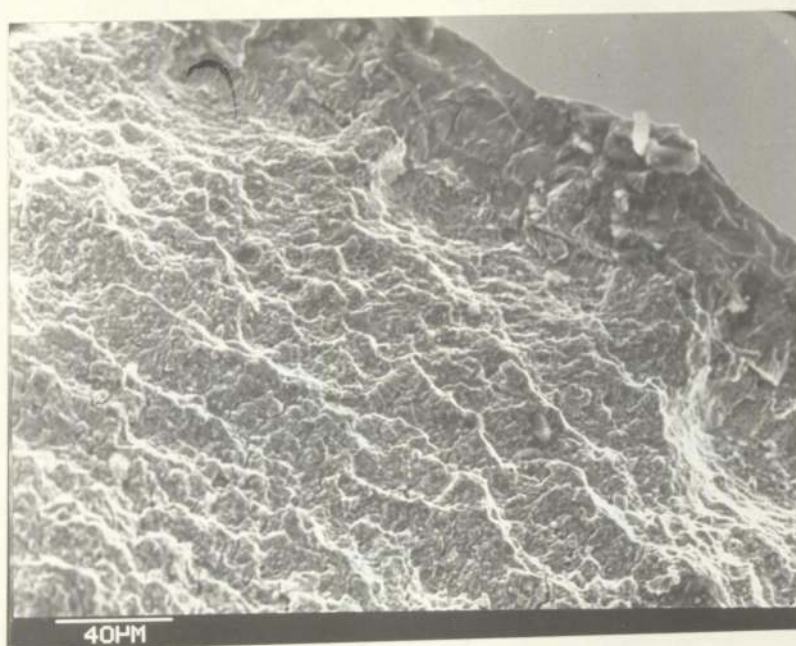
S.E.M. fractograph of a hard Cr plated No.5 die steel fatigue testpiece showing crack initiation at the surface.
